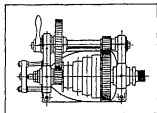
VARIABLE TRANSMISSION AS USED IN A LATHE HEADSTOCK
